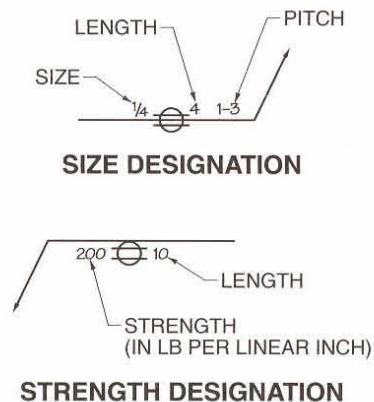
Seam weld designations include size, strength, length of weld seam, and pitch of weld.
